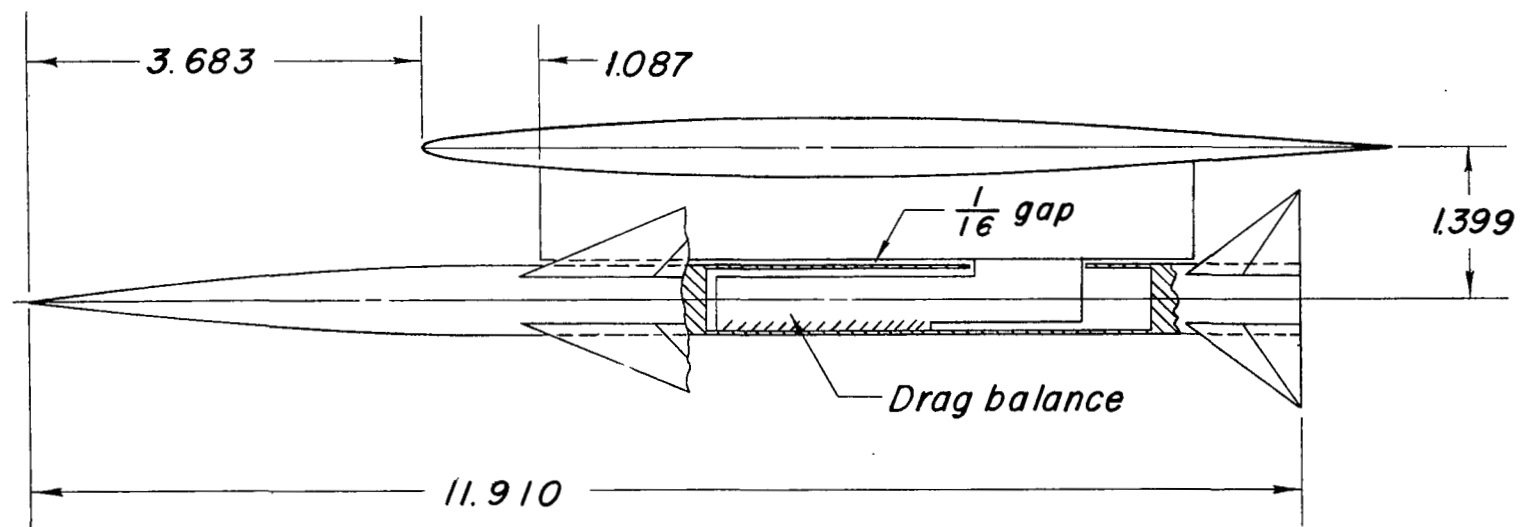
Cutaway drawing of missile model with internal strain-gage drag balance. All dimensions are in inches.
